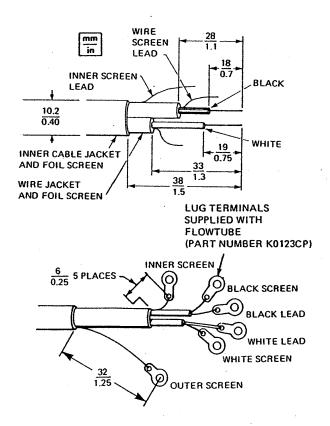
Inner and Lead Jackets of Signal Cable Stripped Back for Connection to Flanged-Body Flowtube Terminals
